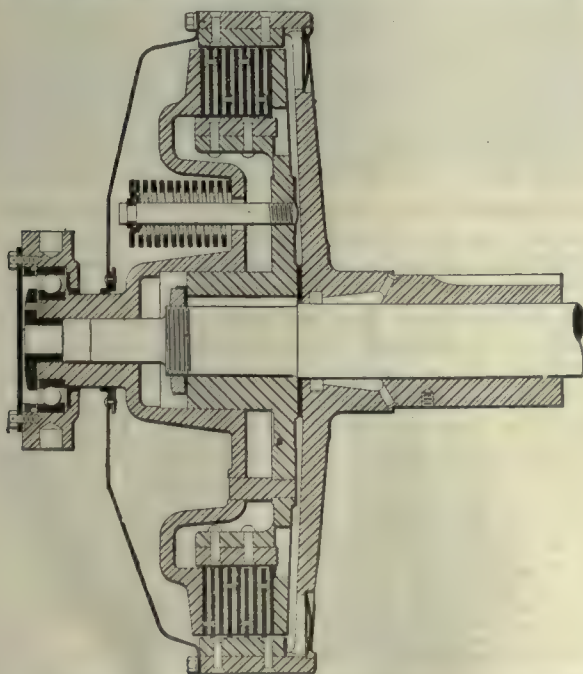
STEERING CLUTCH OF 10-TON MODEL
